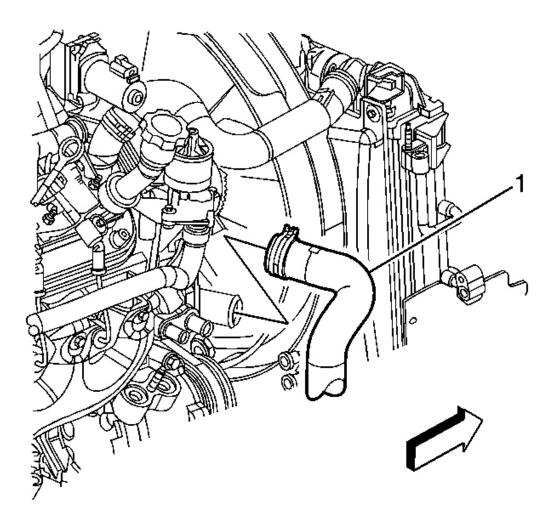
Outlet Hose & Water Outlet Courtesy of GENERAL MOTORS CORP.
